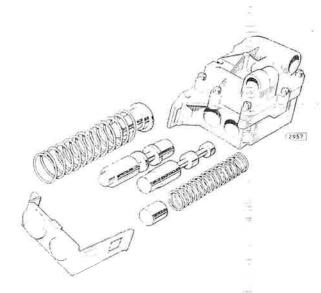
Regulator assembly. Valves, springs and retainer shown exploded.
